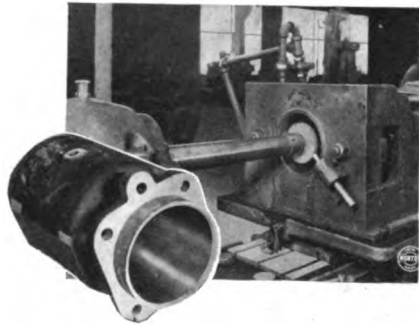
Internal Grinding Operation on a Cylinder for a 10-ton Tractor. A Crystolon Wheel is Used
